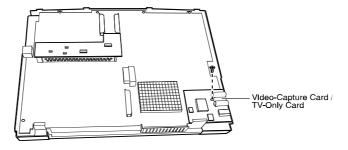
REMOVING THE VIDEO-CAPTURE/TV-ONLY CARD
